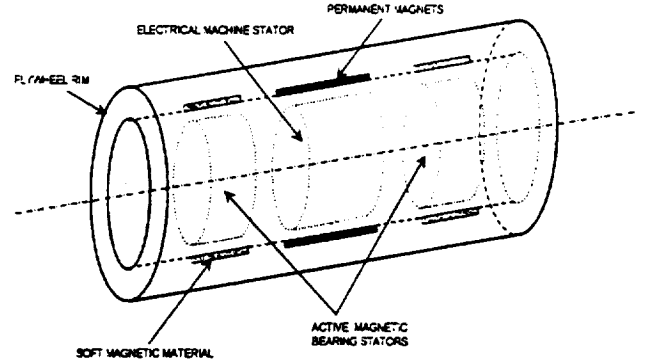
Schematic of fibre composite flywheel, with integral magnetic bearings and electrical machine
